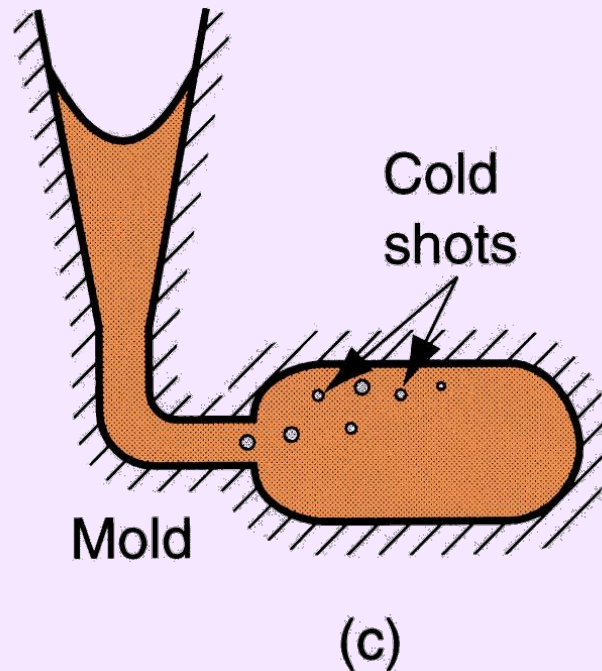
Some common defects in castings: (c) cold shot
